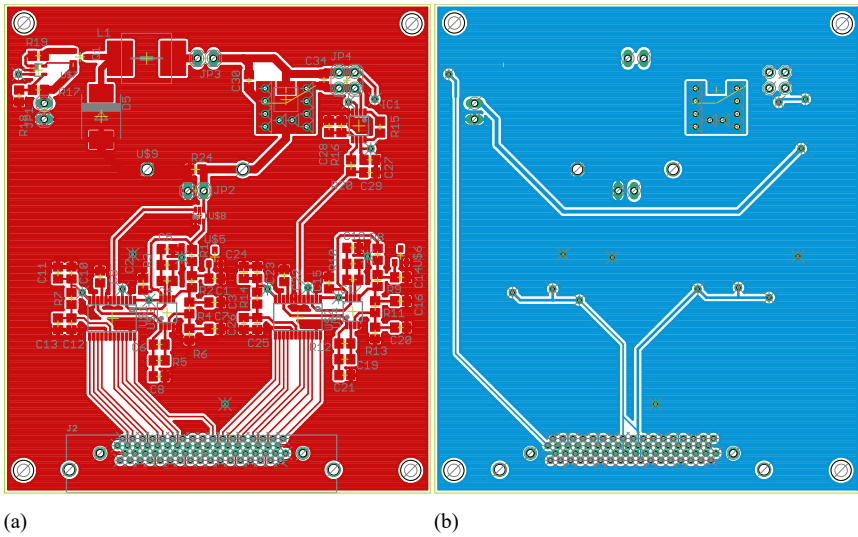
Board layout of the extension board for the discrete implementation top (a) and bottom (b)
